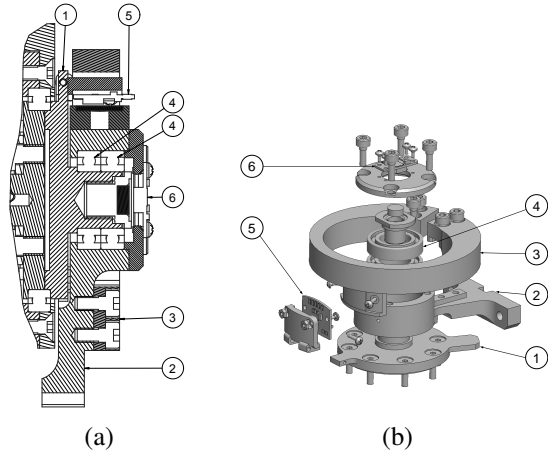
SEA module. The figure shows a cross section drawing (a), and a CAD view (b) of the “C-spring” SEA module. The labelled sub-components are: the motor output part (1), the SEA module output part (2), the “C-spring” (3), the two ball bearings (4), the high resolution relative encoder based on the AS5311 IC (5), and the absolute magnetic encoder based on the AS5040 IC (6).
